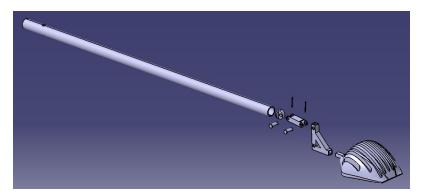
Inner Tube Sub-Assembly. This showcases the workings of the inner tube sub-assembly, which will move to raise and lower the top clamp.
